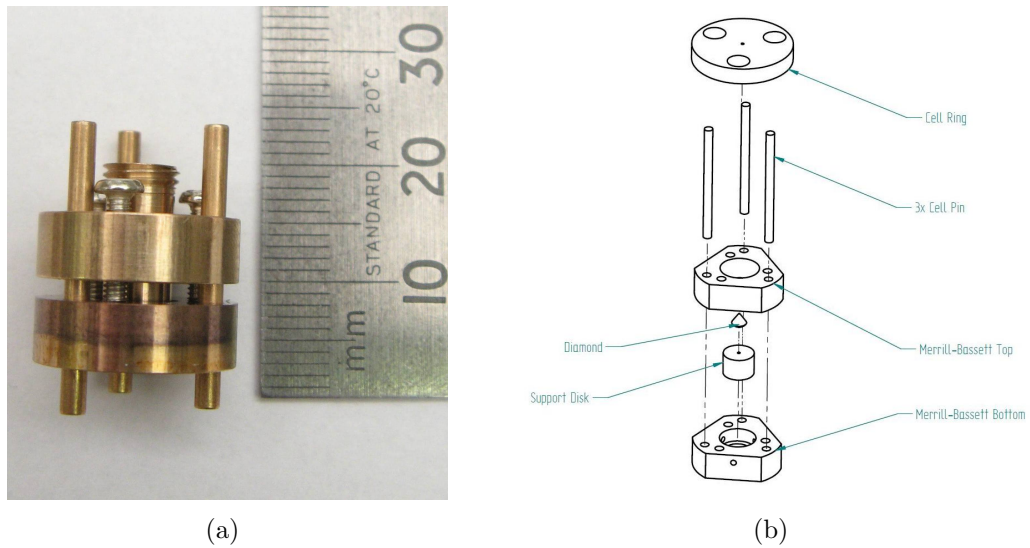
(a) The miniature Merrill-Bassett diamond anvil cell developed for the 2-axis rotator. (b) Exploded view of the cell. The cell pins are used to engage the cell into the rotation state.
